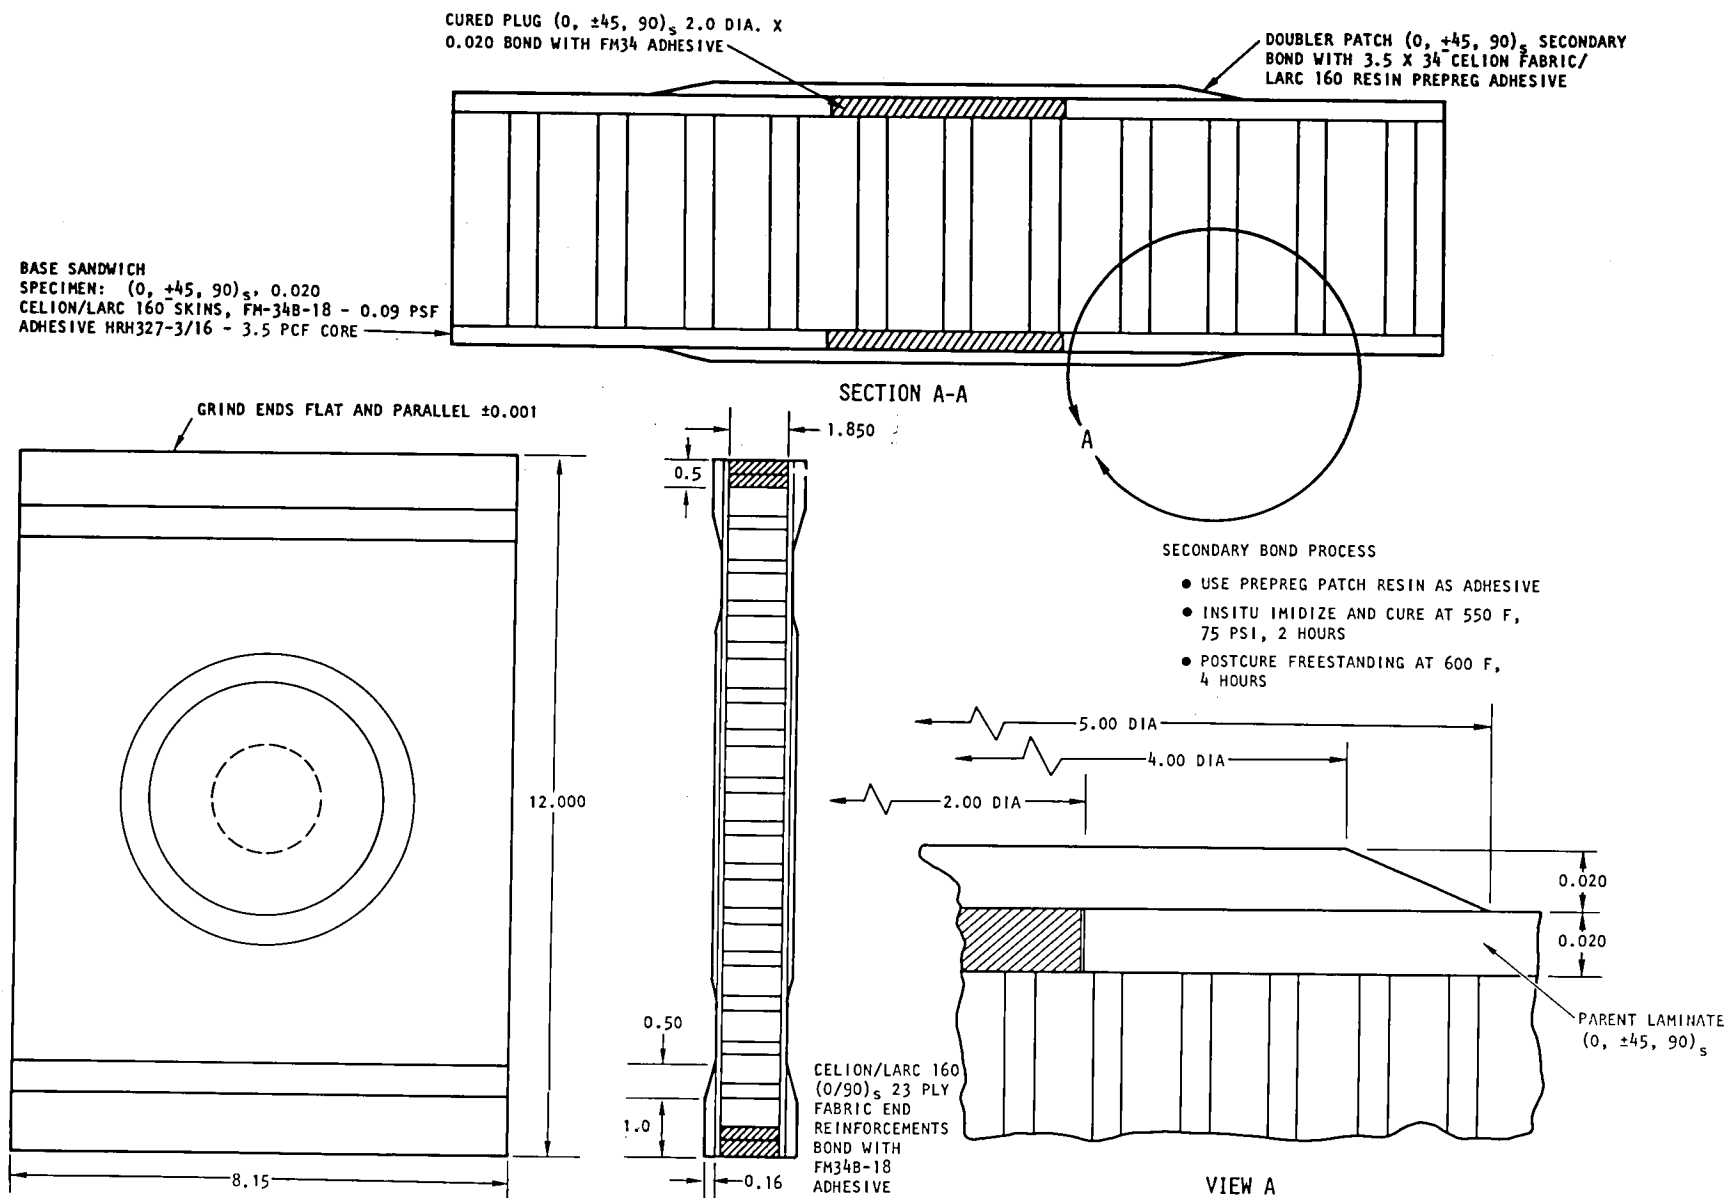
Secondary Bond Repair, Lightly Loaded Sandwich Structure Compression Element Design Concept
